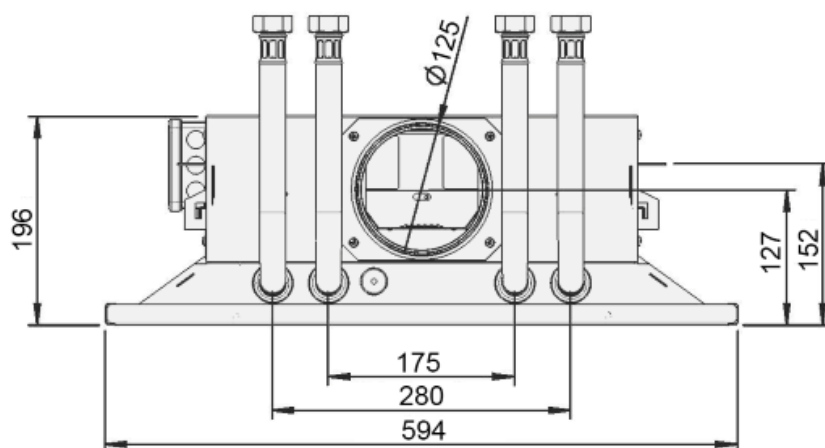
Halton Vita VPR dimensions, cooling and heating
